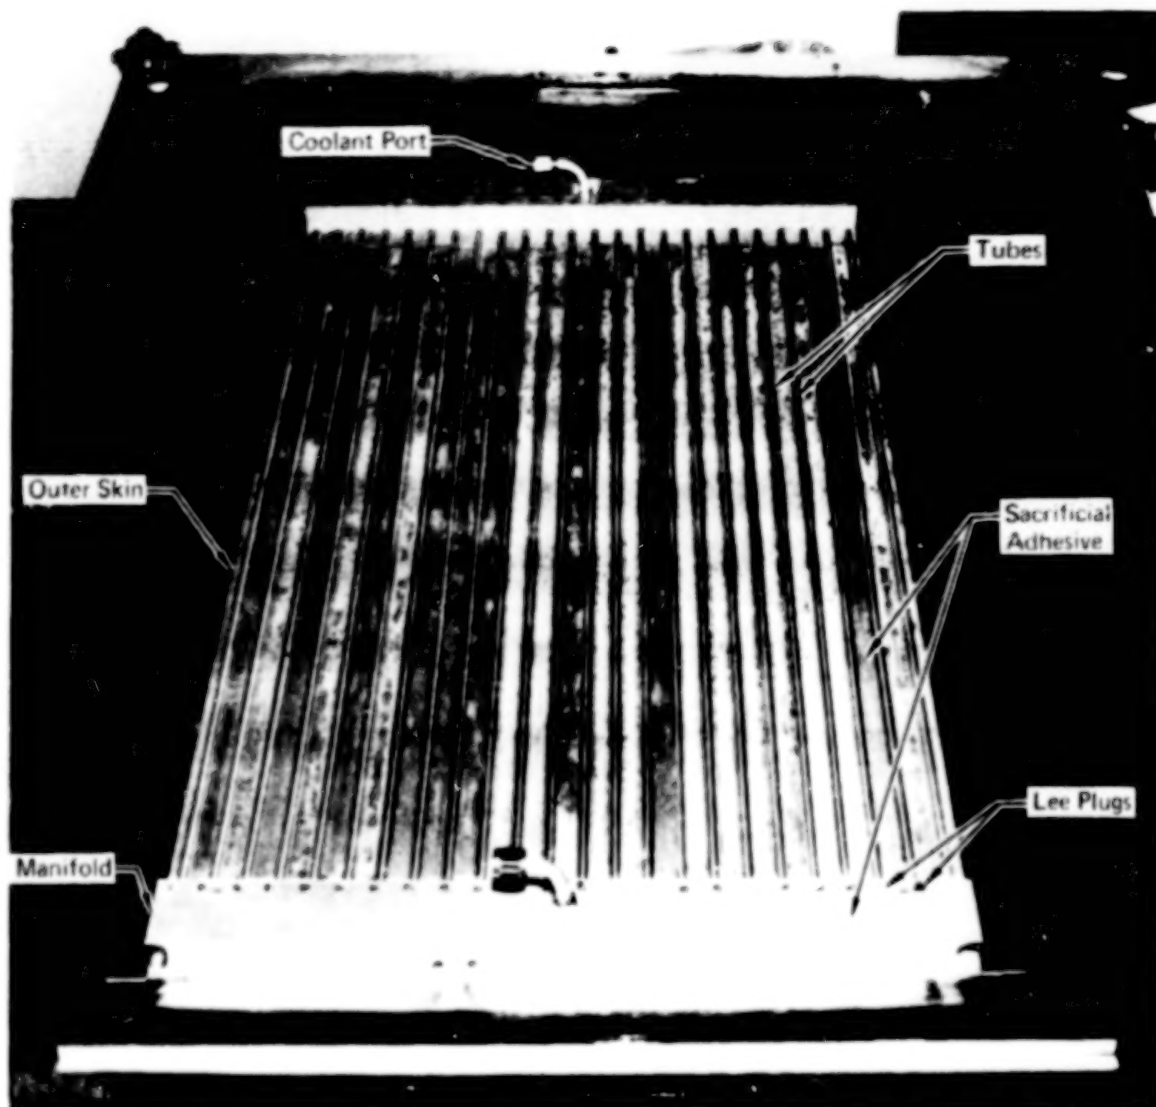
BONDED OUTER SKIN AND TUBE/MANIFOLD ASSEMBLY
